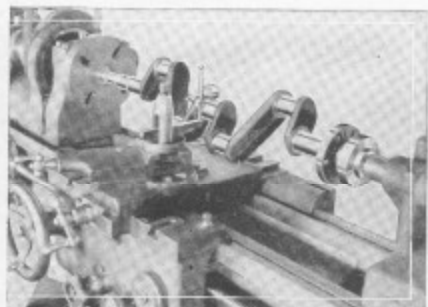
Using a Dial Test Indicator to Test Main Bearings of a Crankshaft.
